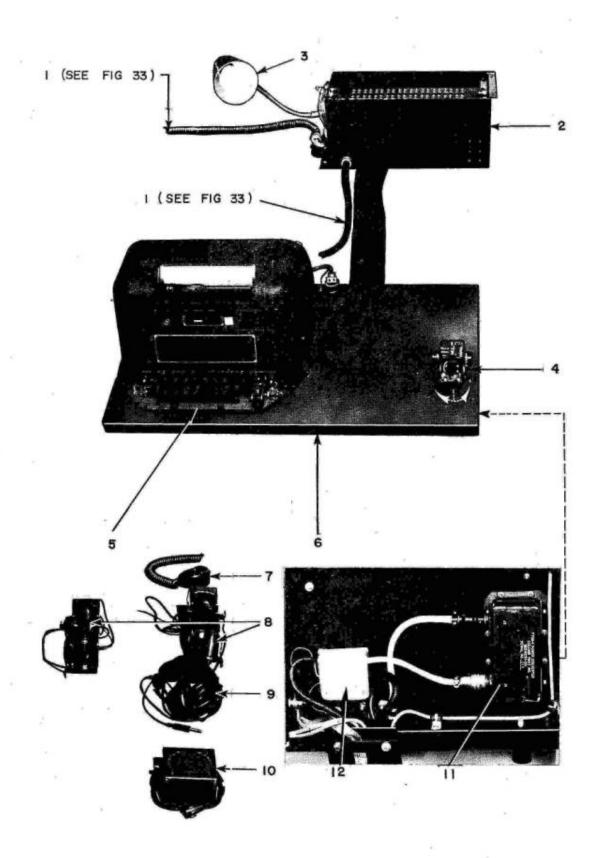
DISMOUNTING EQUIPMENT - STAGE ONE
